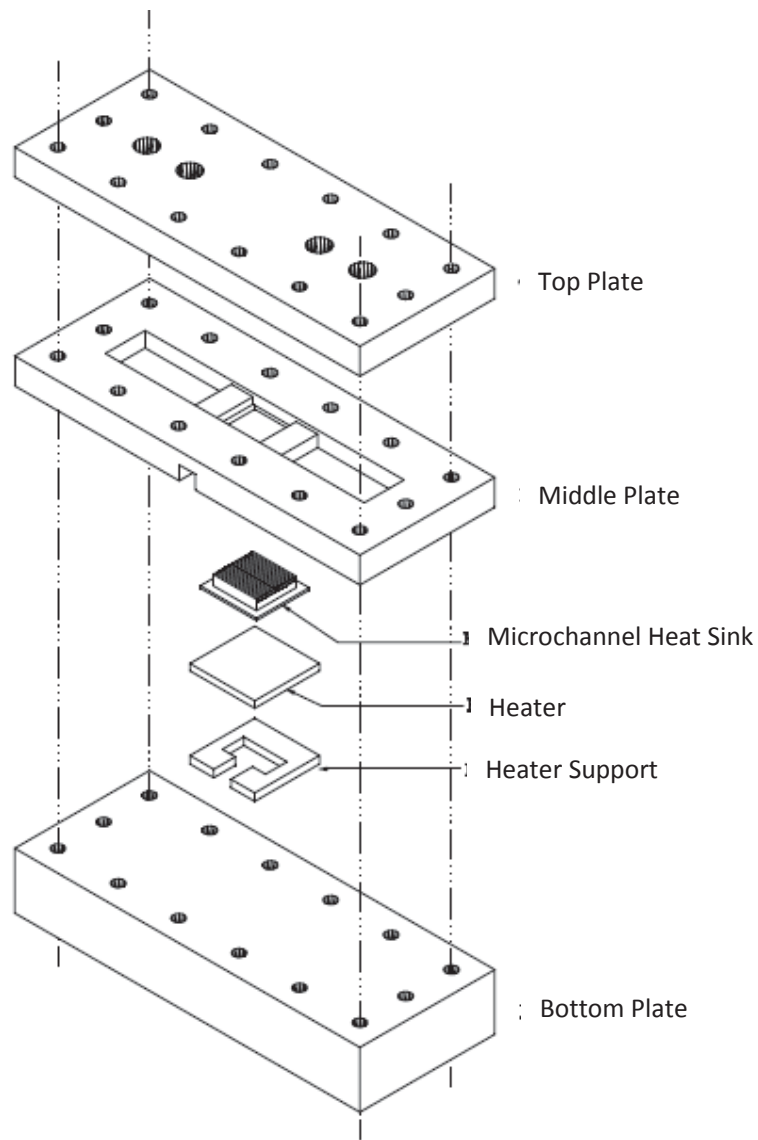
Assembly arrangement of microchannel heat sink with casing and heater.
